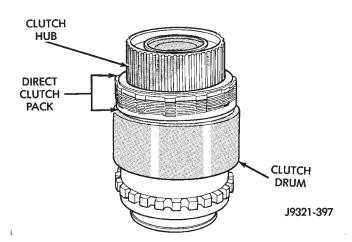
Direct Clutch Pack And Clutch Hub Installation
